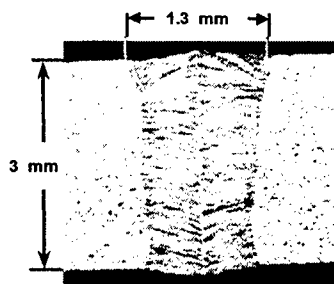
Deep penetration welding of stainless steel with HPDL⁹
